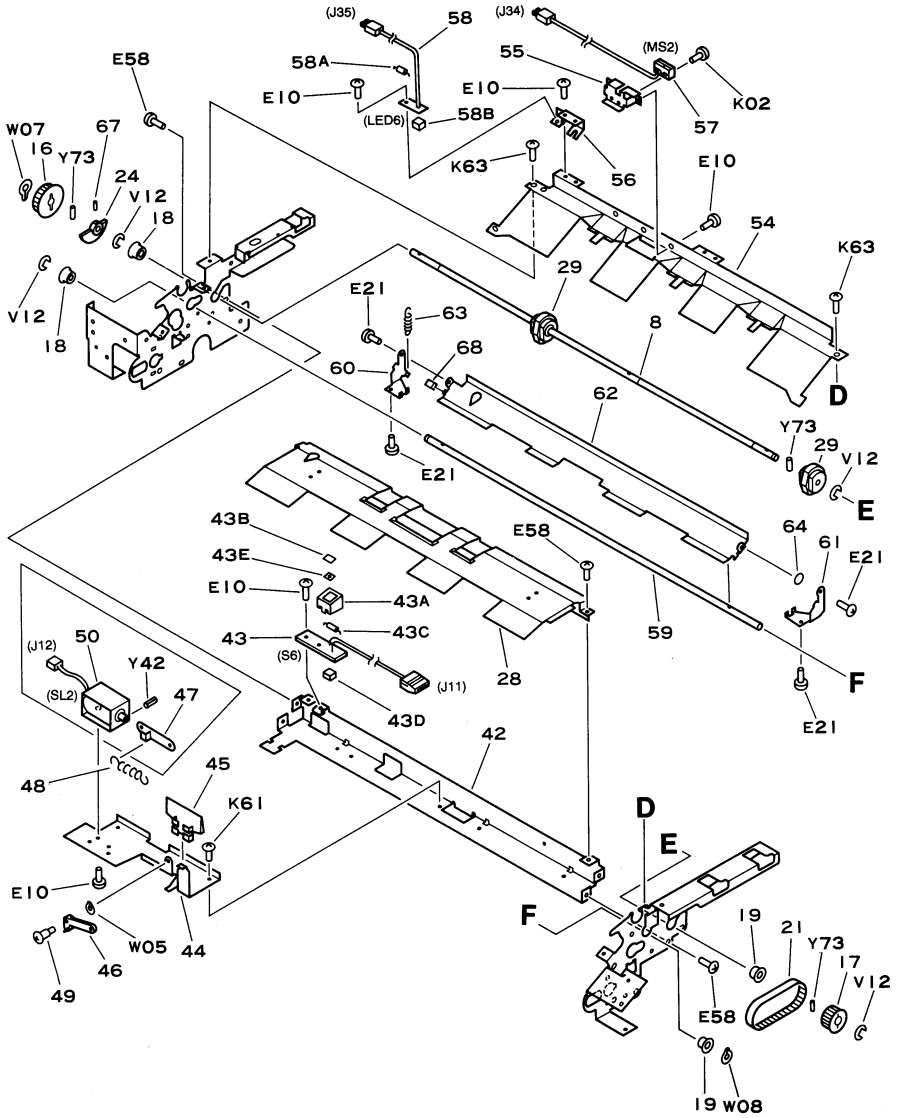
PICK-UP ROLLER ASSEMBLY (3/3)
